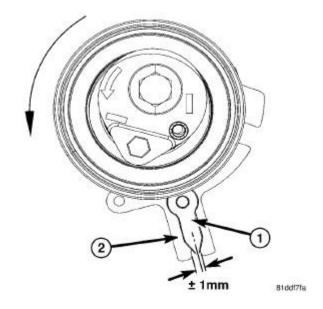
Tensioner Indicator & Tensioner Gage Slot Courtesy of CHRYSLER LLC
